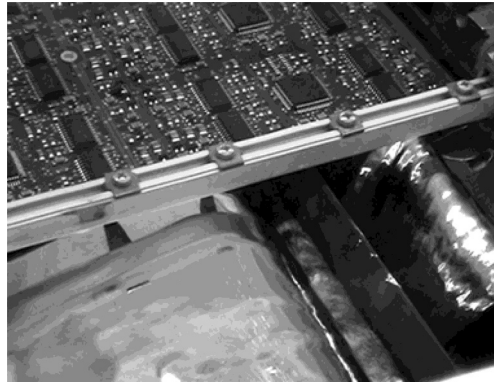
Soldering of the printed-circuit board with contact pads located on one level by the double wave of molten solder.
